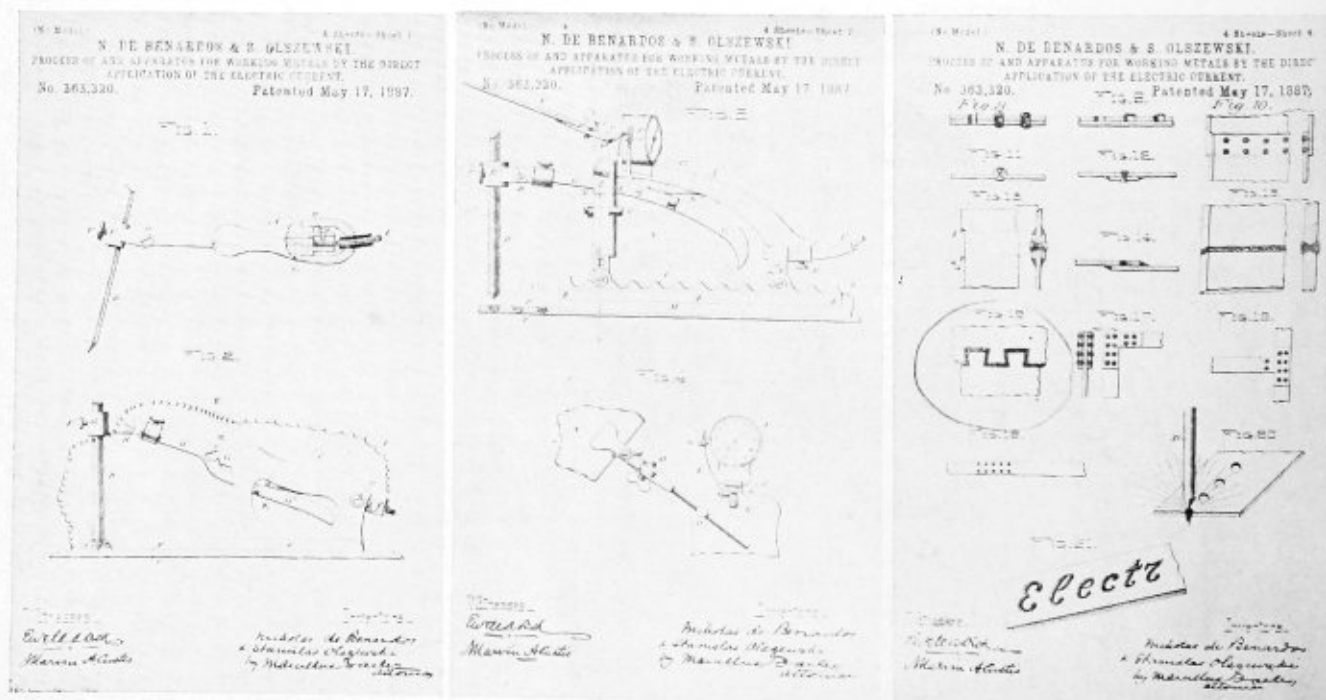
Reproductions of original U. S. Patent, covering arc welding apparatus, in 1887
